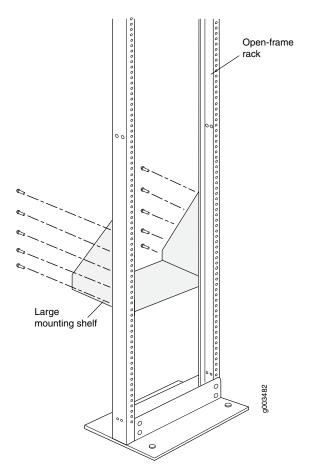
Installing the Mounting Hardware for Front-Mounting in an Open-Frame Rack
